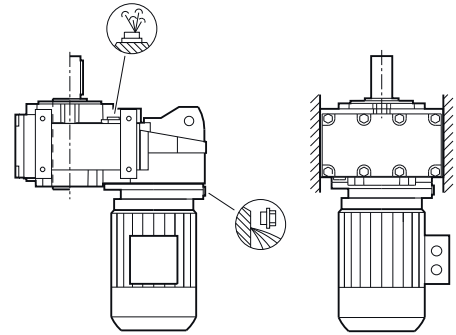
Mounting positions for parallel shaft gearbox F.F flange-mounted design and F.Z with housing flange, sizes 39 - 189
